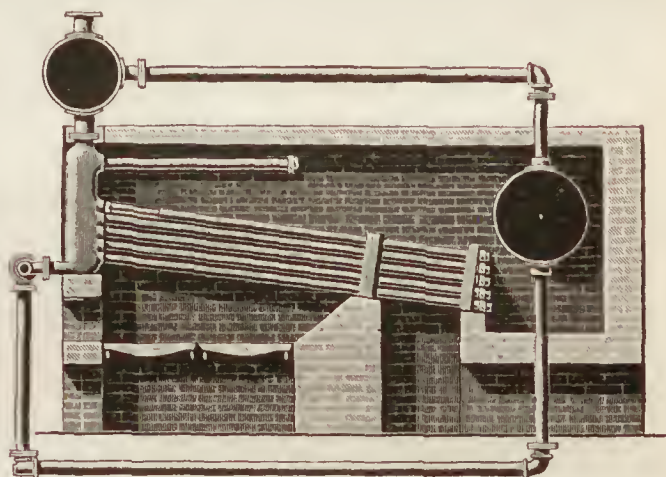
THE W. E. KELLEY BOILER, 1876.
